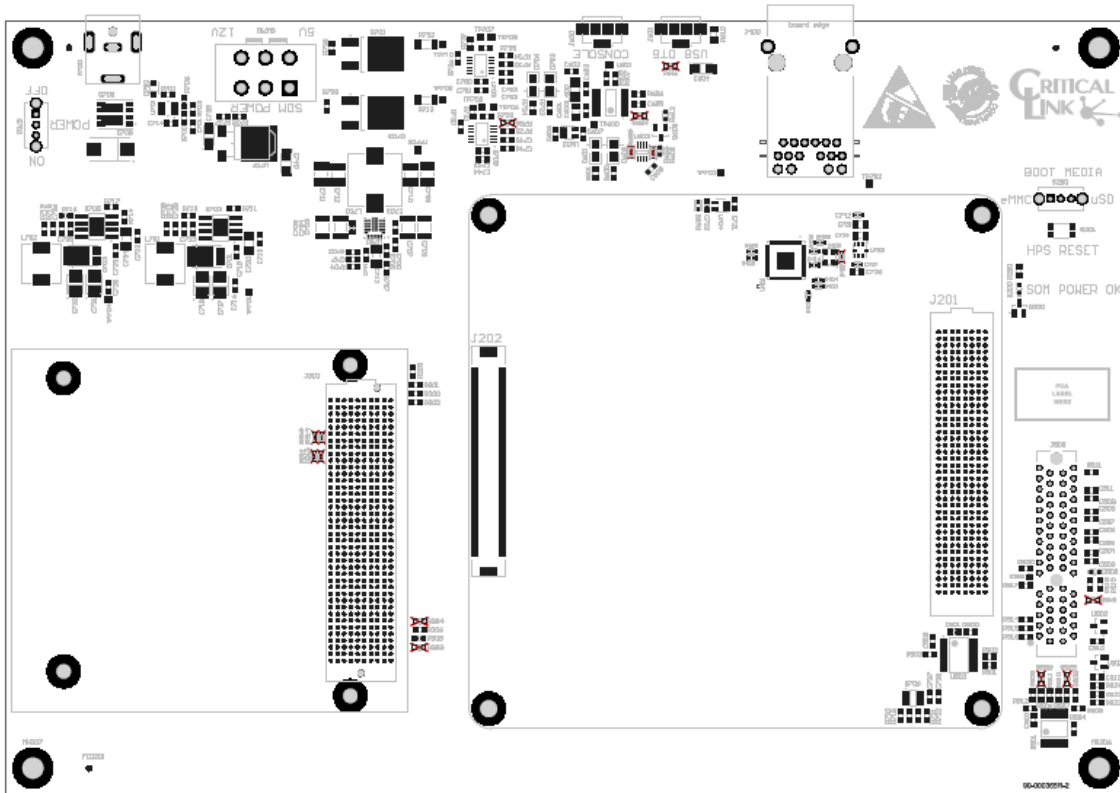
MitySOM-A10S Development Kit Outline, Mounting Hole Locations, (Top View)
